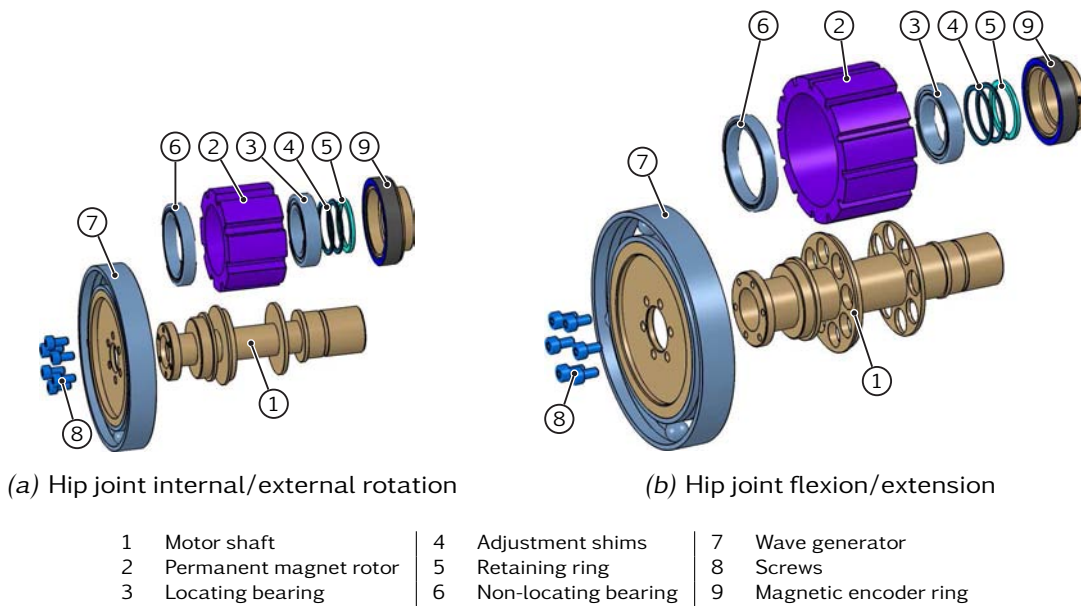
Harmonic Drive-based revolute joint with crossed roller bearing, here: hip joint internal/external rotation drive (type 'C')
